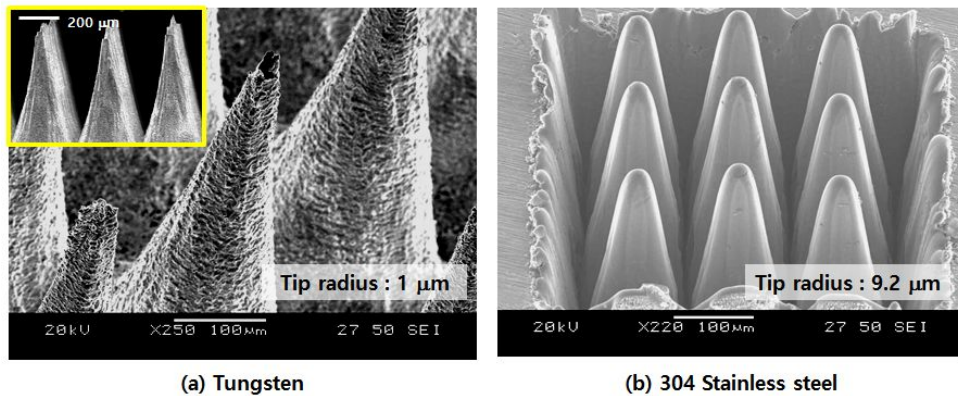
SEM images of textured structure that were fabricated by using laser beam machining (a) Tungsten and (b) 304 stainless steel
